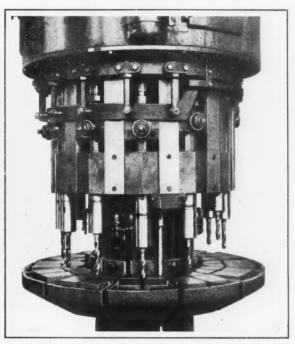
Automatic Feeding Arrangement on Davis & Thompson Continuous Drilling Machine
